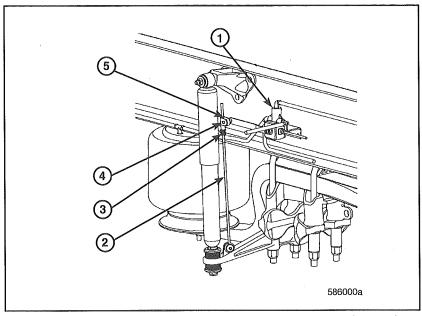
Height-Control Valve with Rubber Rod Ends (AL-405)
